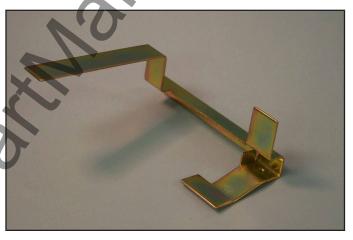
Trip Finger to be used with a Short Trip Shaft (Style Number 9A10093G06).
